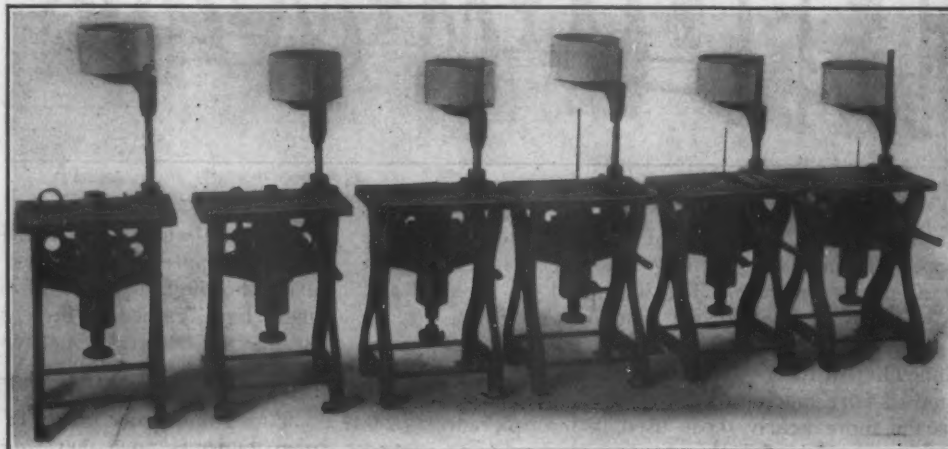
Wadsworth Core Machines with the Dies Drawn Down Through the Table.
